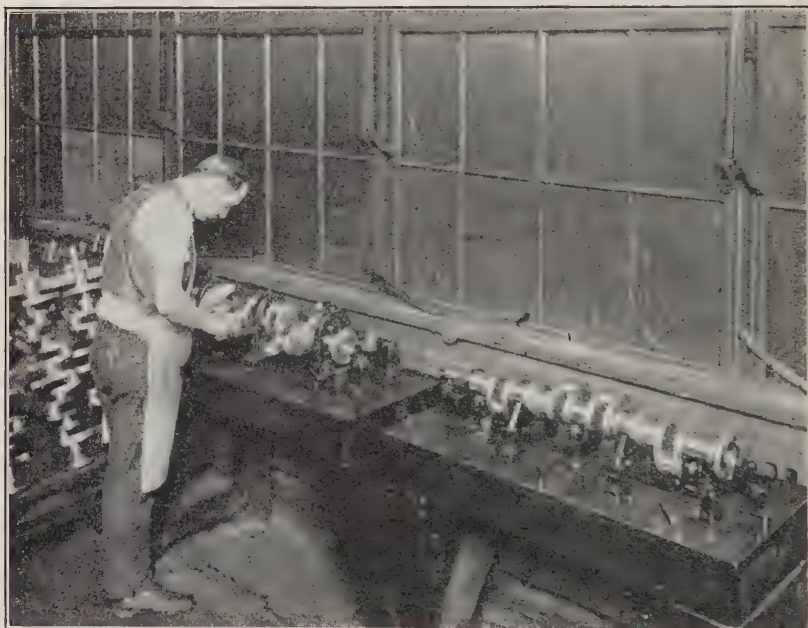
Checking the Size of the Main Bearing and Crank Pin Diameters
